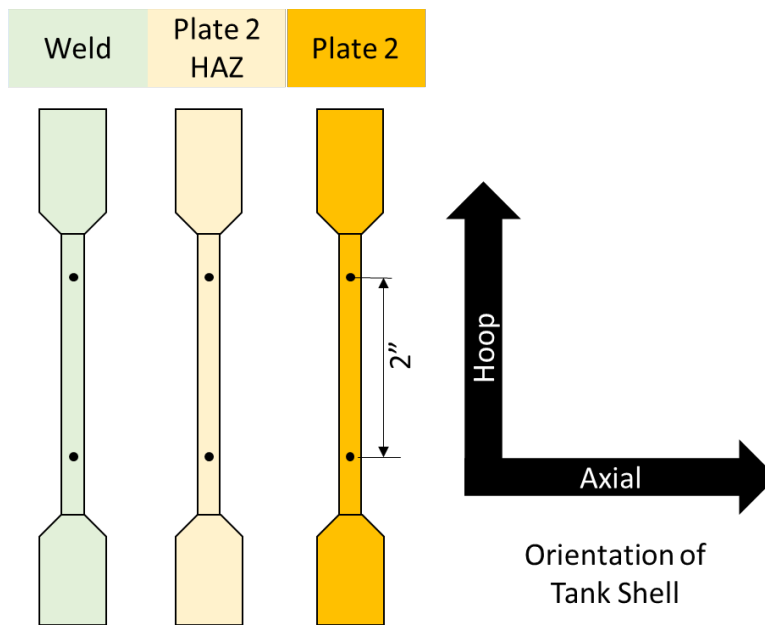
Orientation of Welded Tensile Coupons, Hoop Orientation
